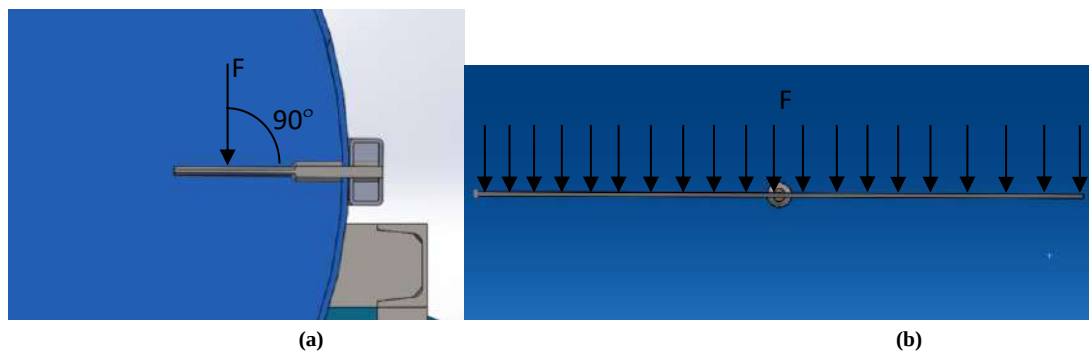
The load distribution on the position agitator 180° (a) front view (b) appears side-to-side with A-A pieces
